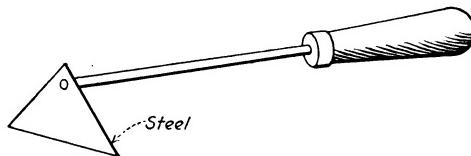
A hand scraper used in preparing surfaces to receive solder
